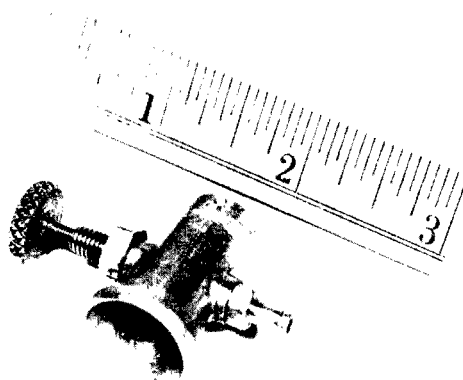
Air Horn and Needle Valve Assembly Used on Commercial Miniature Engines of the Model Aircraft Size
